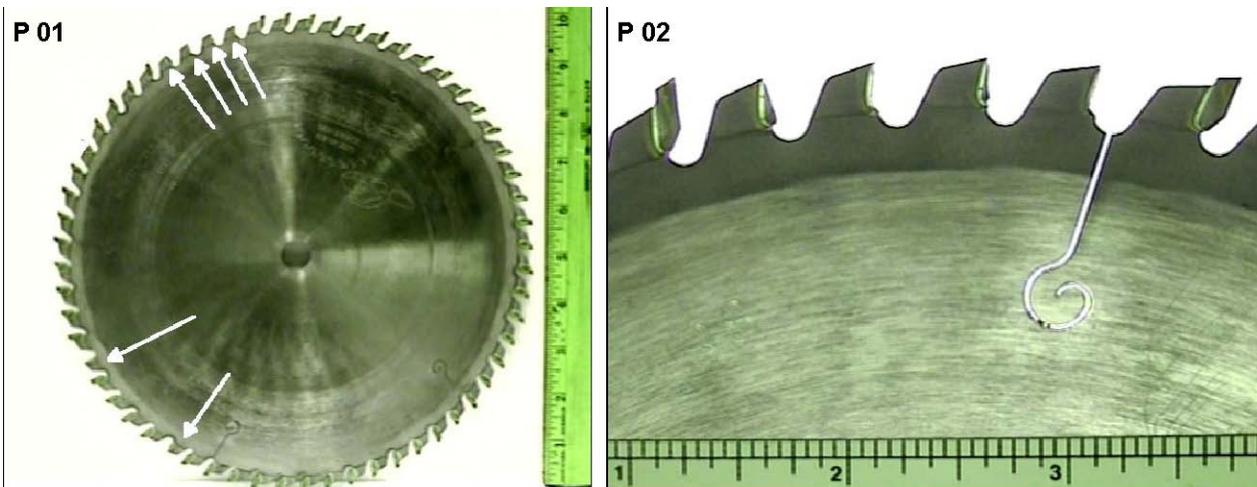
above left shows the condition of the as-submitted blade. At least six major fractures are identified by arrows. Photo 02 above right shows a bank of teeth including four consecutive failed tooth sections.
